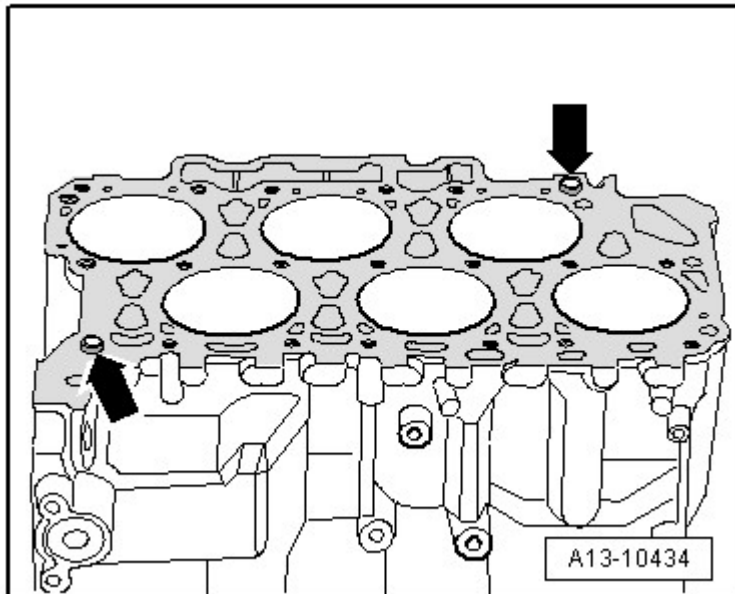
Identifying Fitting Sleeves Inserted In Cylinder Block -Arrows-
